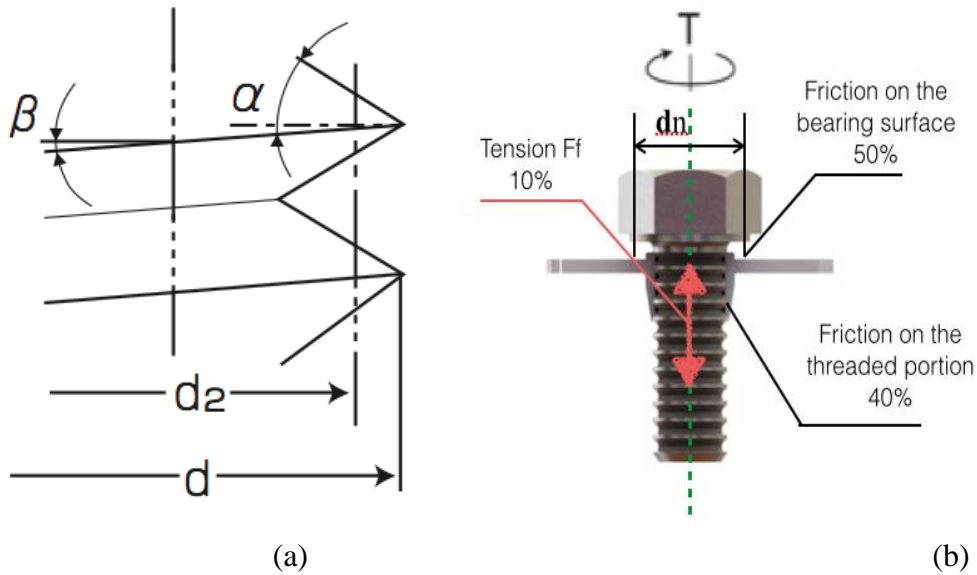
(a) Detail drawing (b) Rotational drawing [10]
